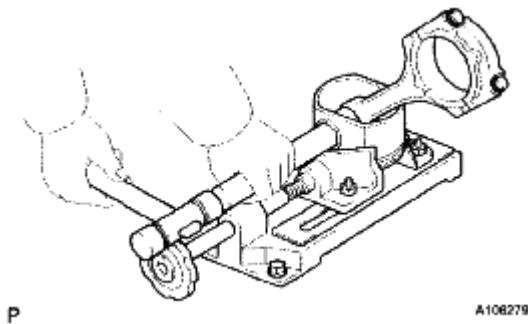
Tapping Out Piston Pin And Connecting Rod
